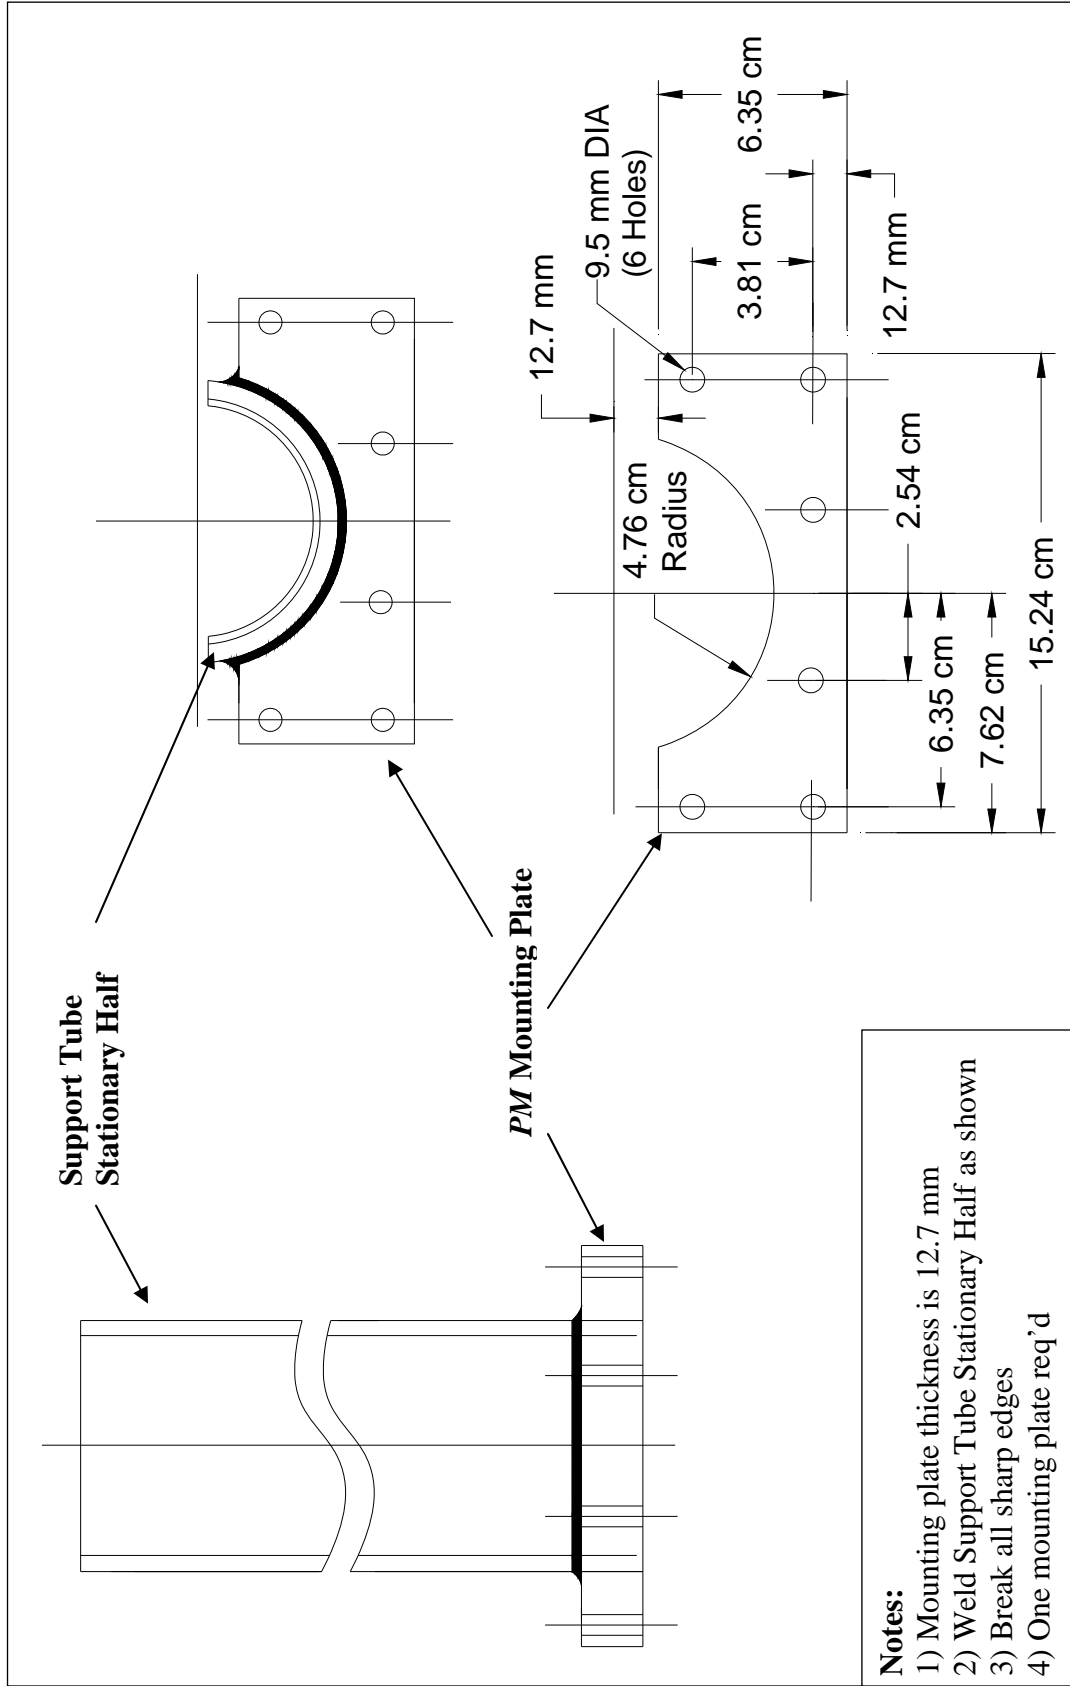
PM Mold Assembly: Mounting Plate and Support Tube Stationary Half
